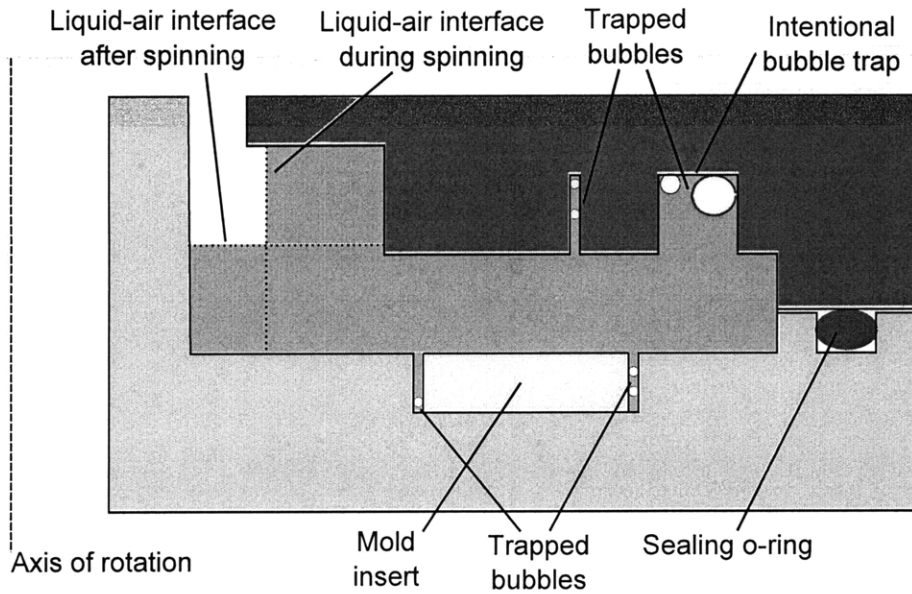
Cavities or trenches in a centrifugal mold assembly that can catch bubbles.
